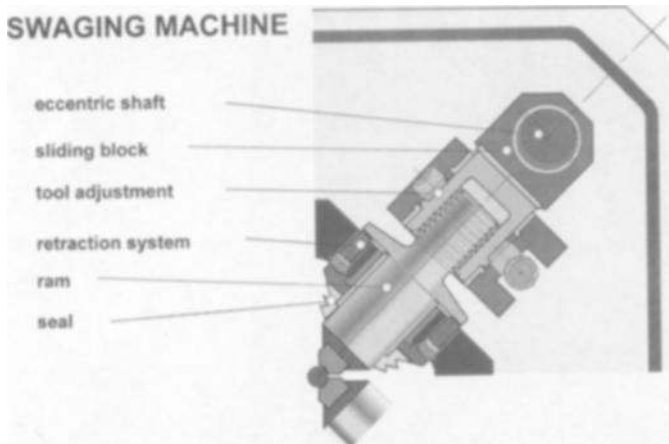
Sketch of the hammer arrangement and drive in a radial rotary forging machine. (Courtesy American GFM Corporation)
